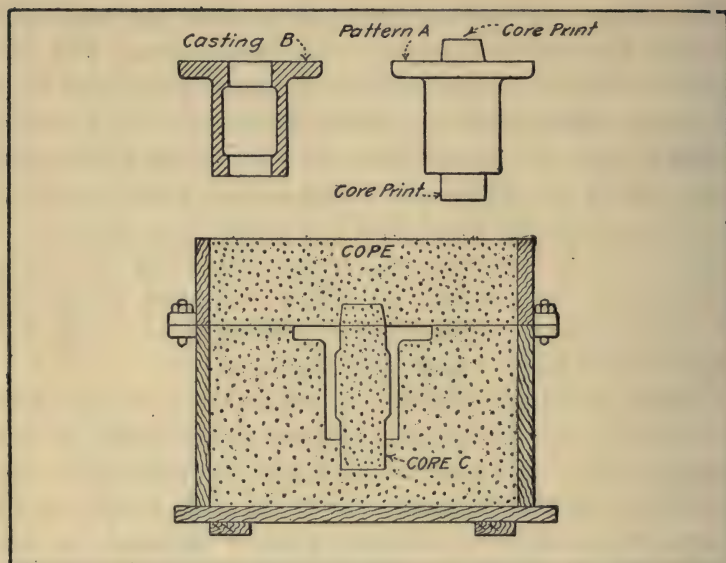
MOLD AND PATTERN SHOWING USE OF BAKED CORE
